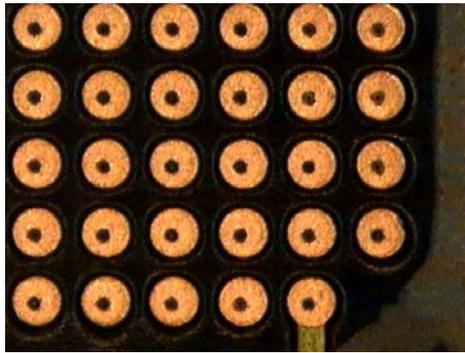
An example of the PCB Layout for 0.4 mm Pitch CSP (Microvia In Pad)
